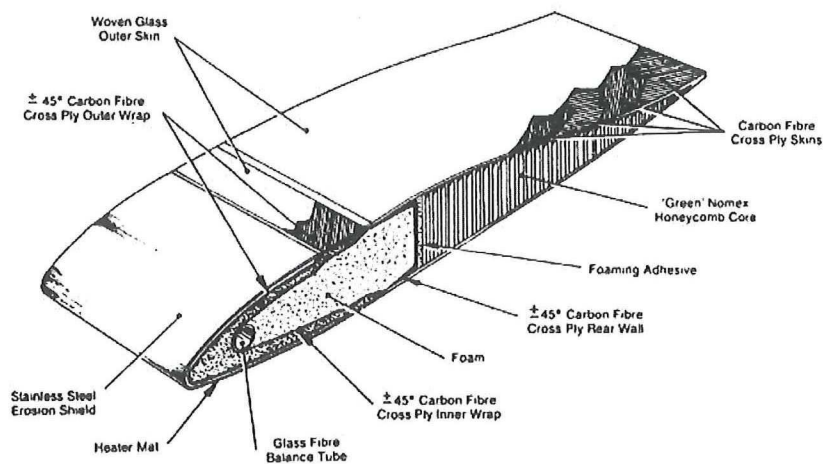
Sectional view of a composite Sea King helicopter rotor blade (5)
